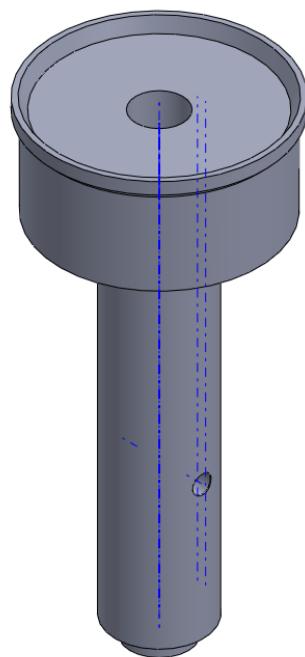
Kumar, Vishakh: Emergency Switch Main Casing
